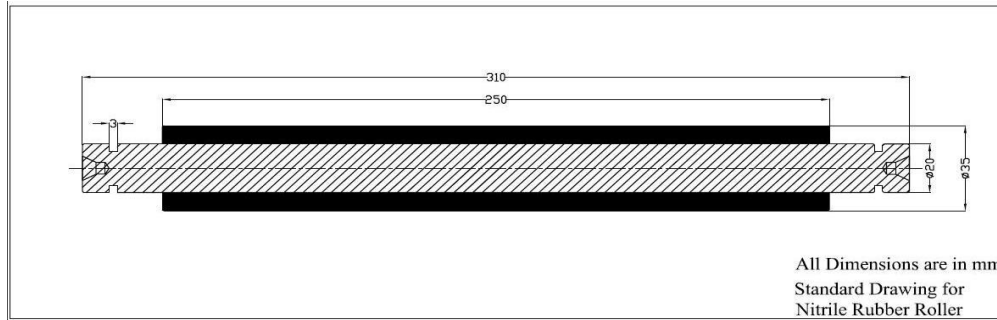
Standard Drawing for Nitrile Rubber Roller
